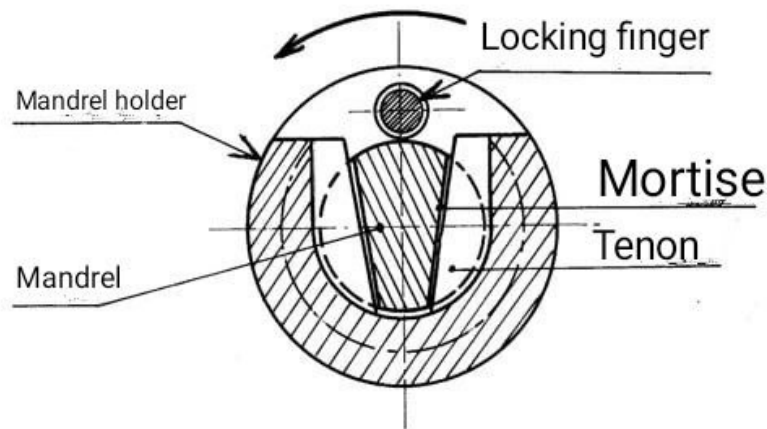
A pneumatically controlled locking finger allows the mandrel to be held in place during its rotation [6].
